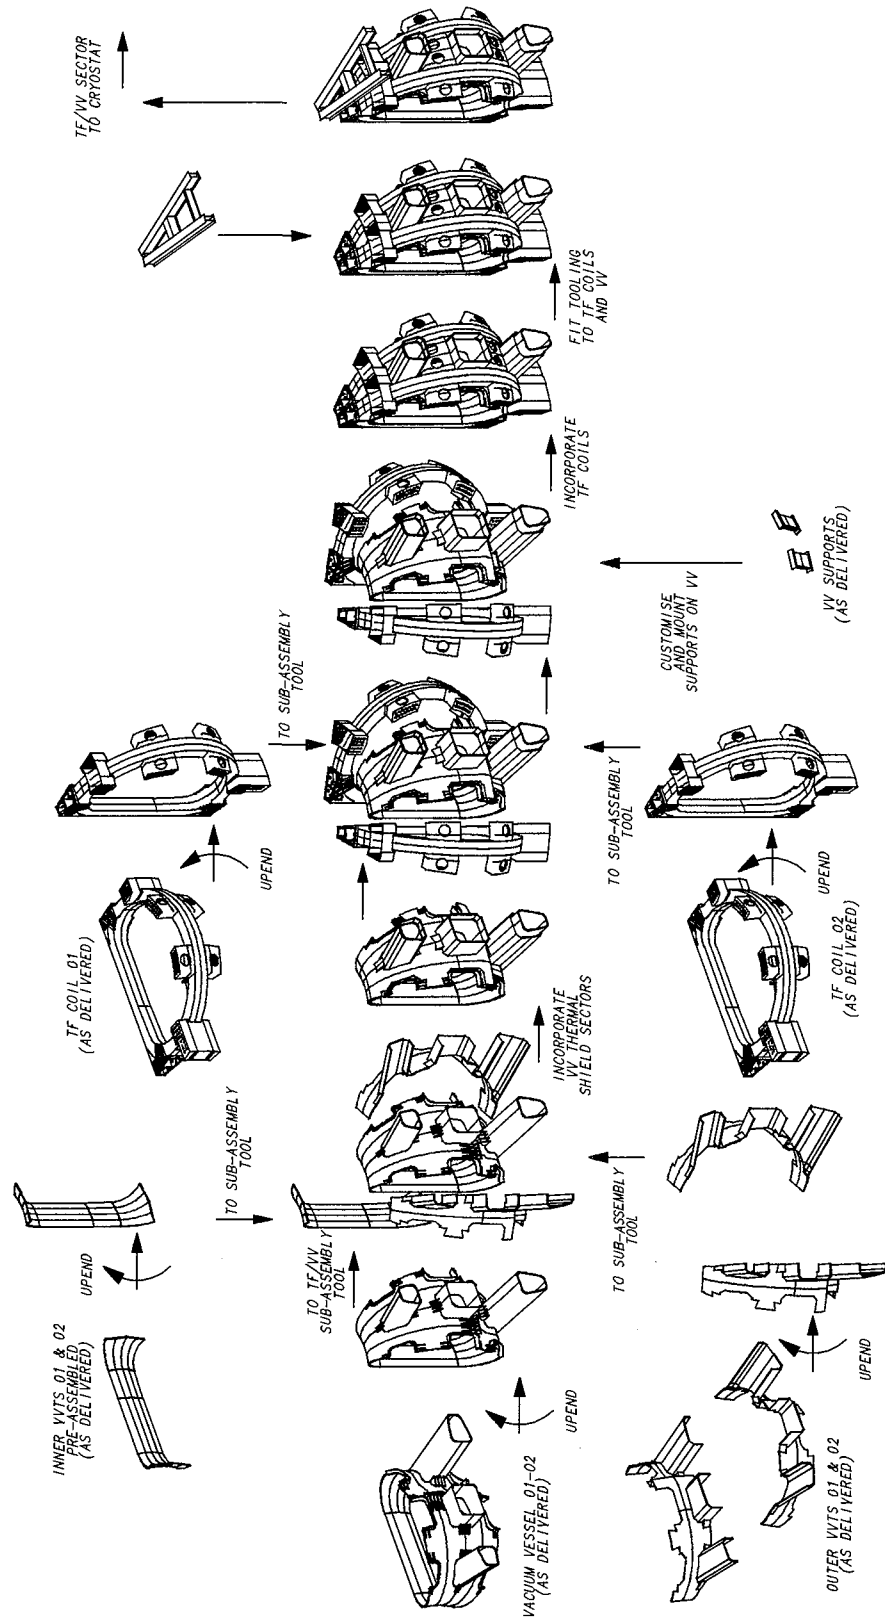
Sub-assembly of TF/VV/VVTS using Separated Inboard and Outboard VVTS Sectors
